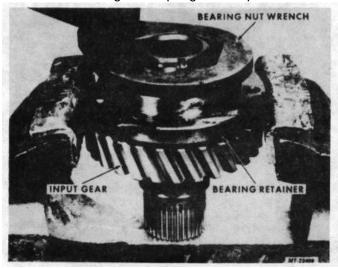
Removing Input Gear Bearing Retainer Nut (RA-351, 355 Shown RA-341 Similar)
